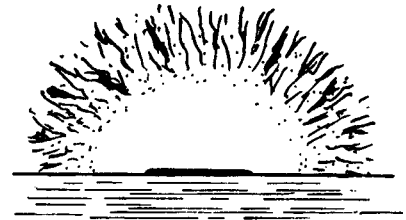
Fractographic Signs of Machining Damage or Scratches
